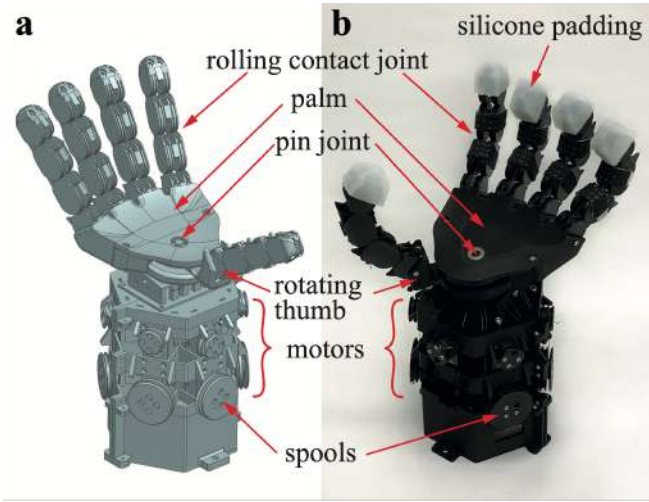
a) CAD model of Rotograb with five fingers, including the rotating thumb, and the actuation tower below the wrist with motors and spools. b) Assembled 3d-printed Rotograb with silicon padding for increased contact friction.
